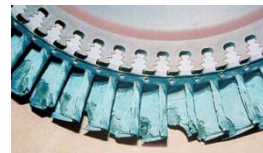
Hot gas corrosion of an HPT rotor, [6].
